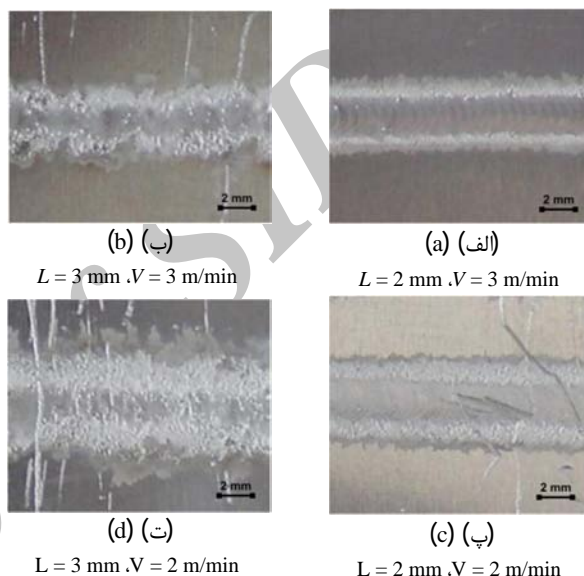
The weld top surface for the GTAW welding in various welding conditions
